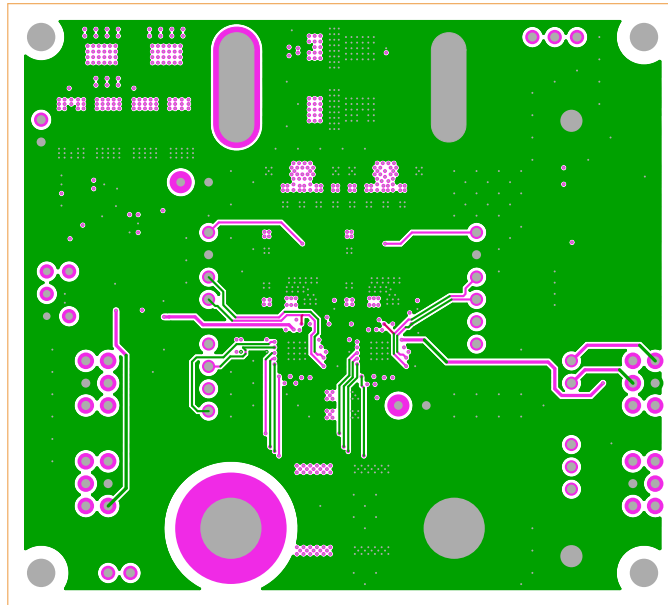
PCB - Inner Layer - Layer 5 (Top View)
